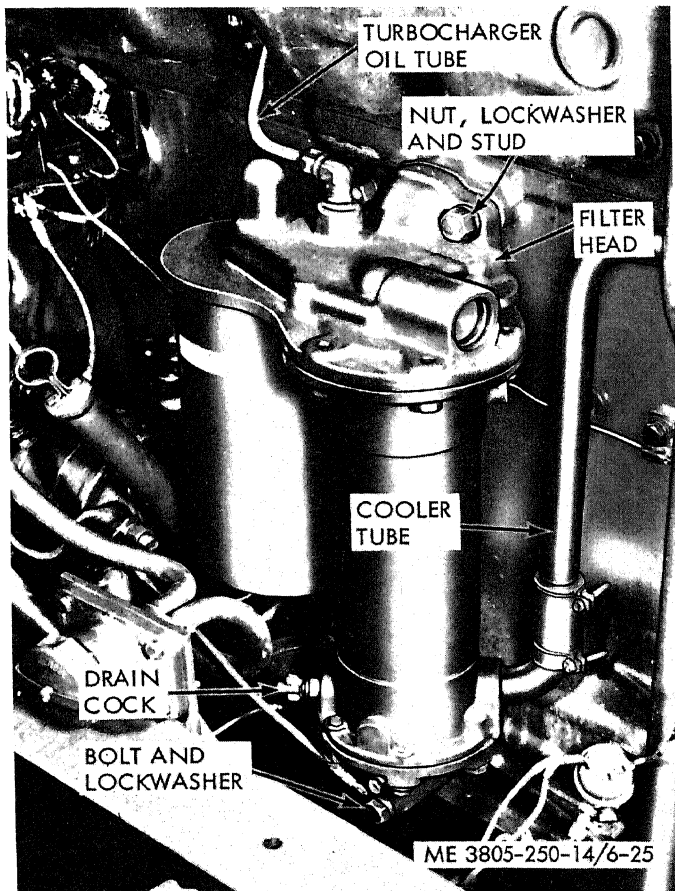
Oil cooler and oil filter assembly, removal and installation.
